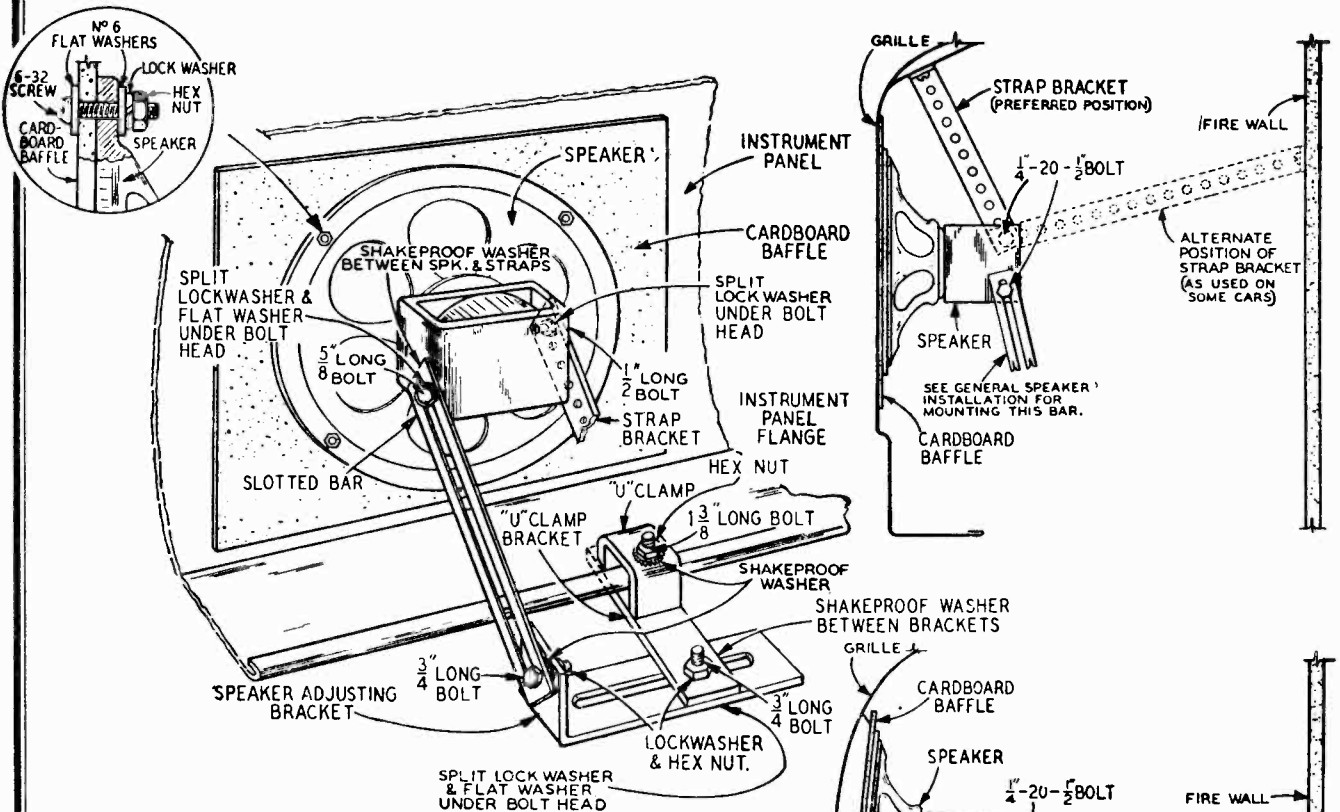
Typical Methods of Mounting Speaker Behind Instrument Panel Grille
